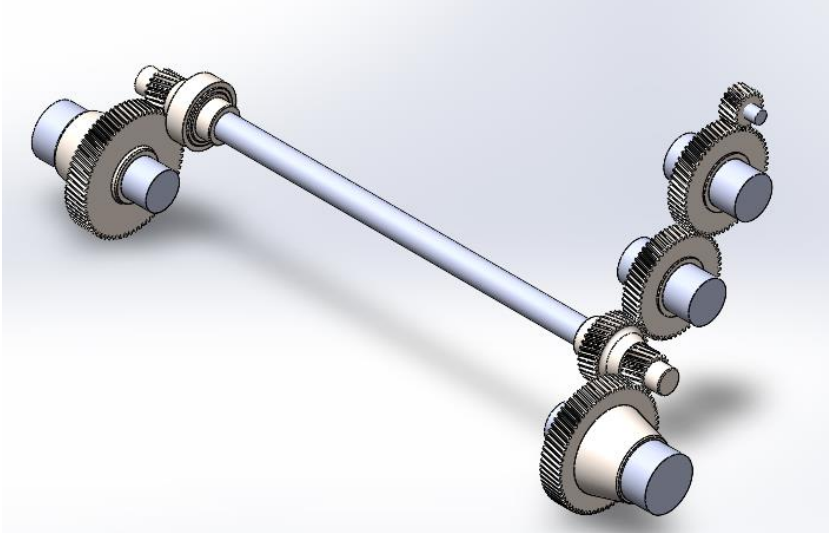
3D perspective view of the gears of the bridge gear reducer.
